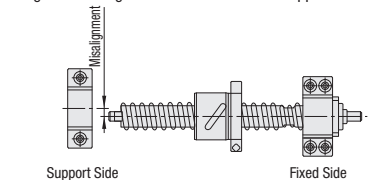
Parallelism Error of Linear Guide and Ball Screw
